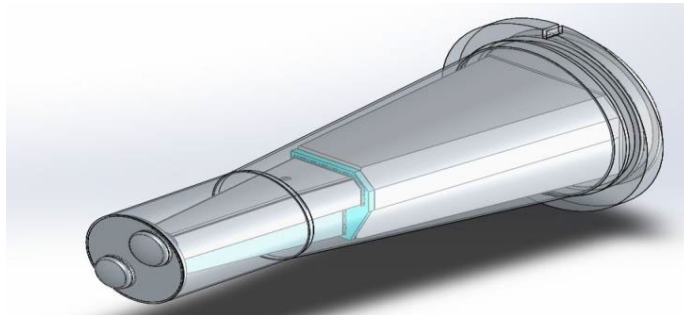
Drawing of the H1-H2 beam plug with a total length of 3.5m.
